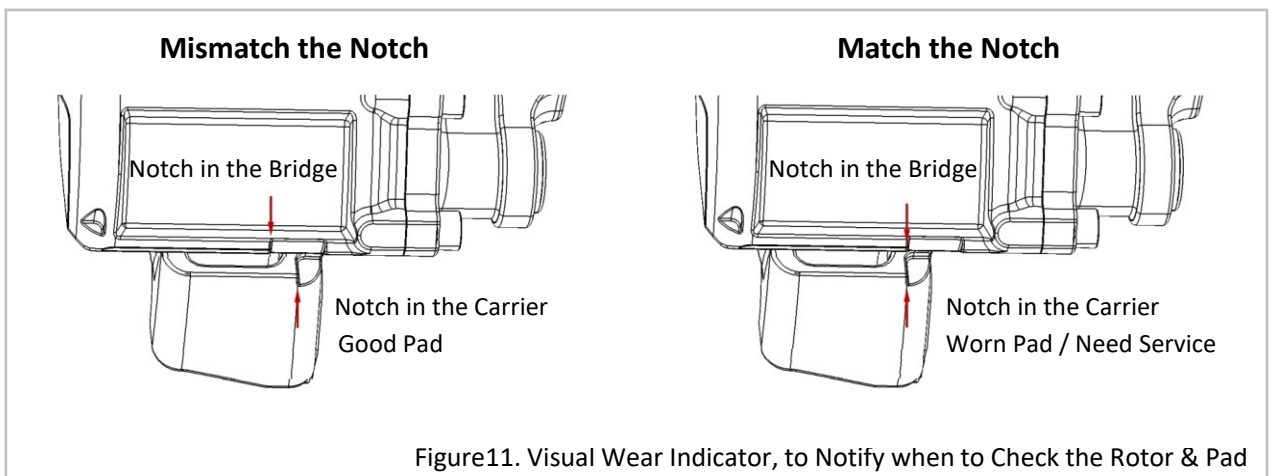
Visual Wear Indicator, to Notify when to Check the Rotor & Pad
